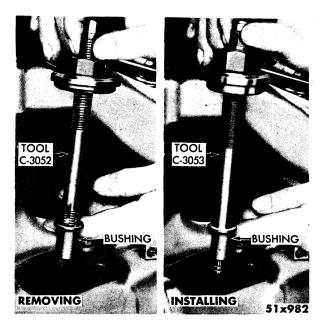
Removing and Installing The Distributor Driveshaft Bushing
